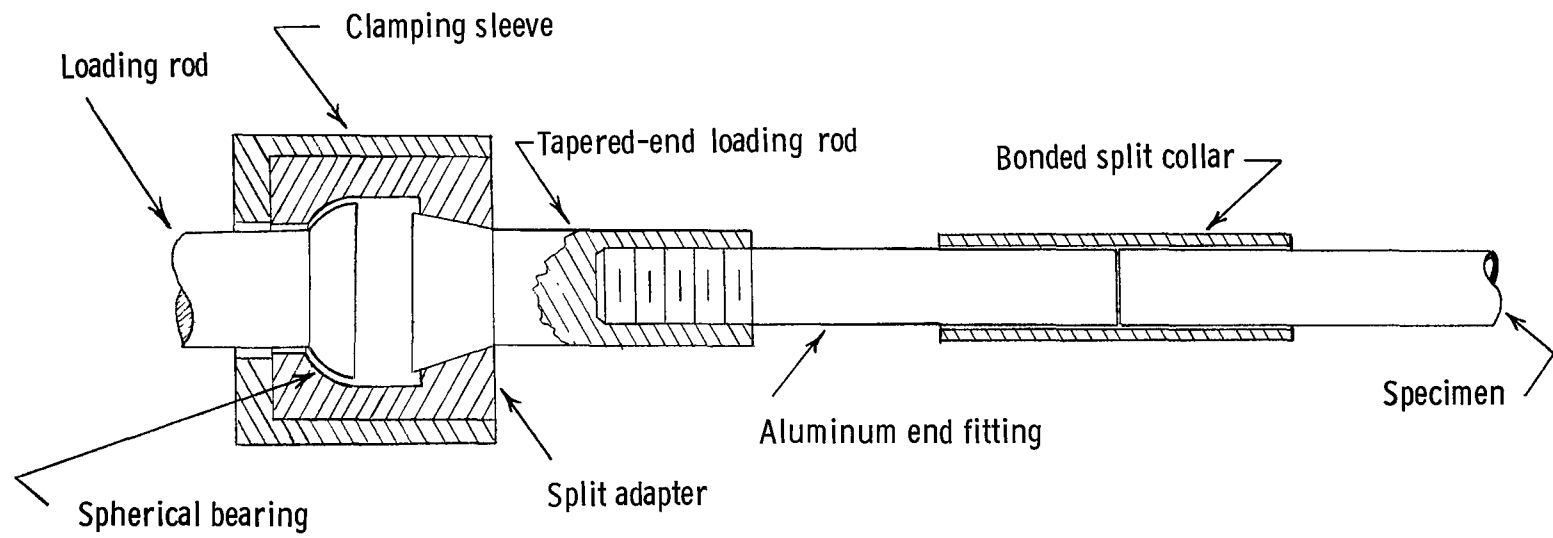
Grip assembly for tubular beryllium tensile specimens.
